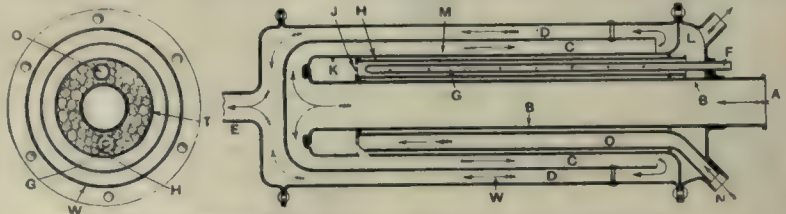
Longitudinal and cross sections of the G.C. carburetter.
